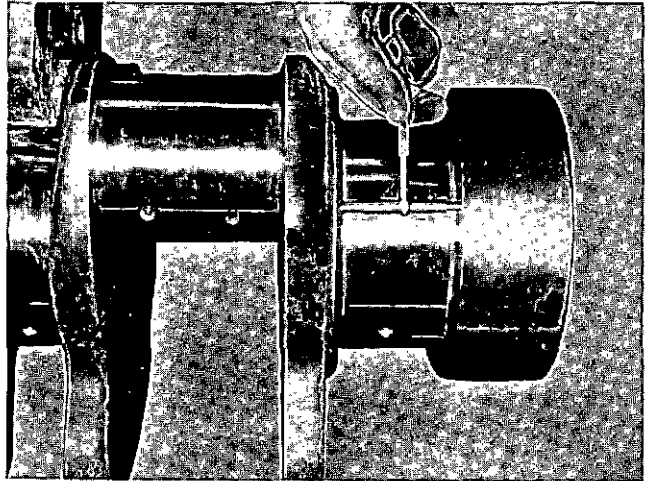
, V40170. Checking crankshaft flange for wear
